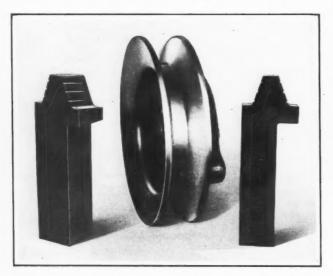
Fan Driving Pulley and Carboloy Tools; Pieces Machined per Grind: Roughing, 300; Finishing, 1500
